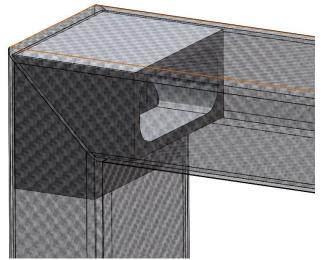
Internal lugs machined out of aluminum will align and bond the carbon tubes with high strength epoxy.
